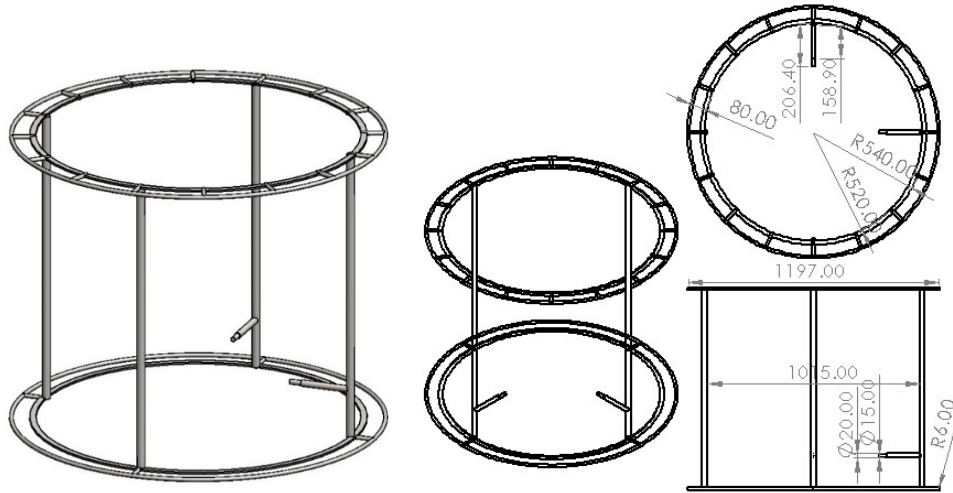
Stove Frame Tube Metal with its dimensions of Cylindrical Cook-Stove Model.
